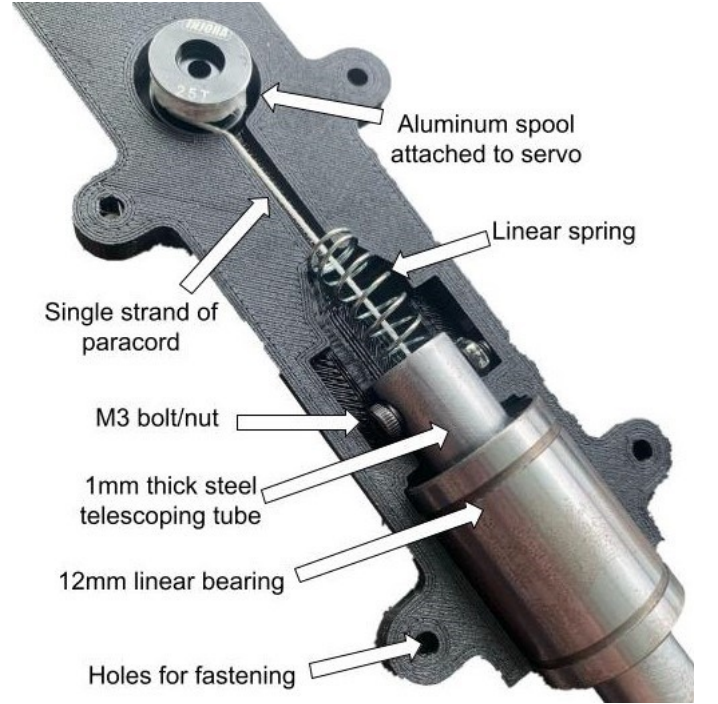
A cross-sectional view of the spring-based telescoping leg mechanism. As the spool rotates, the spring is compressed and the steel tube telescopes through the linear bearing.
